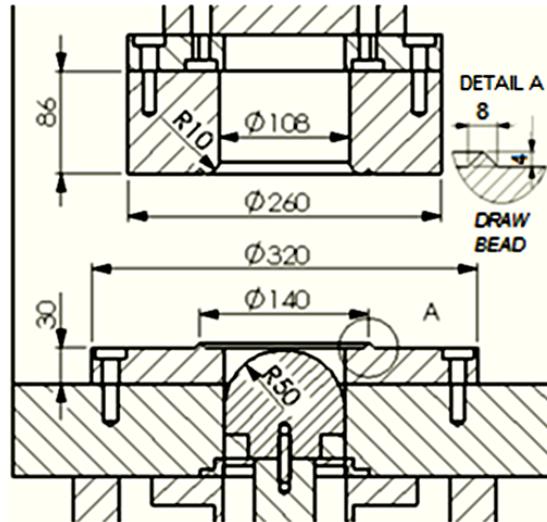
Hemispherical punch of radius 50 mm with drawbead in the blankholder (dimensions in mm).
